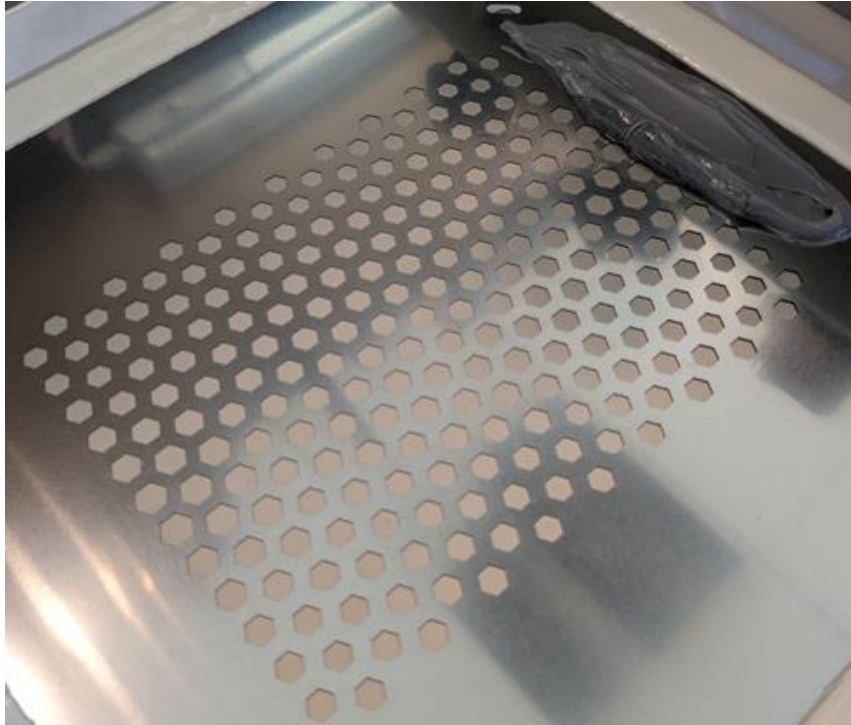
LM3 module in fixture with stencil-to-mounting surface in full contact
